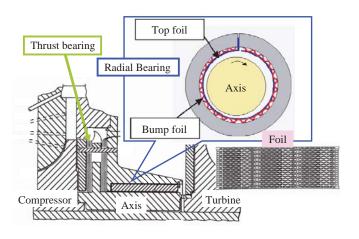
Foil bearings incorporated in Capstone microturbine.⁵⁻⁹⁾
